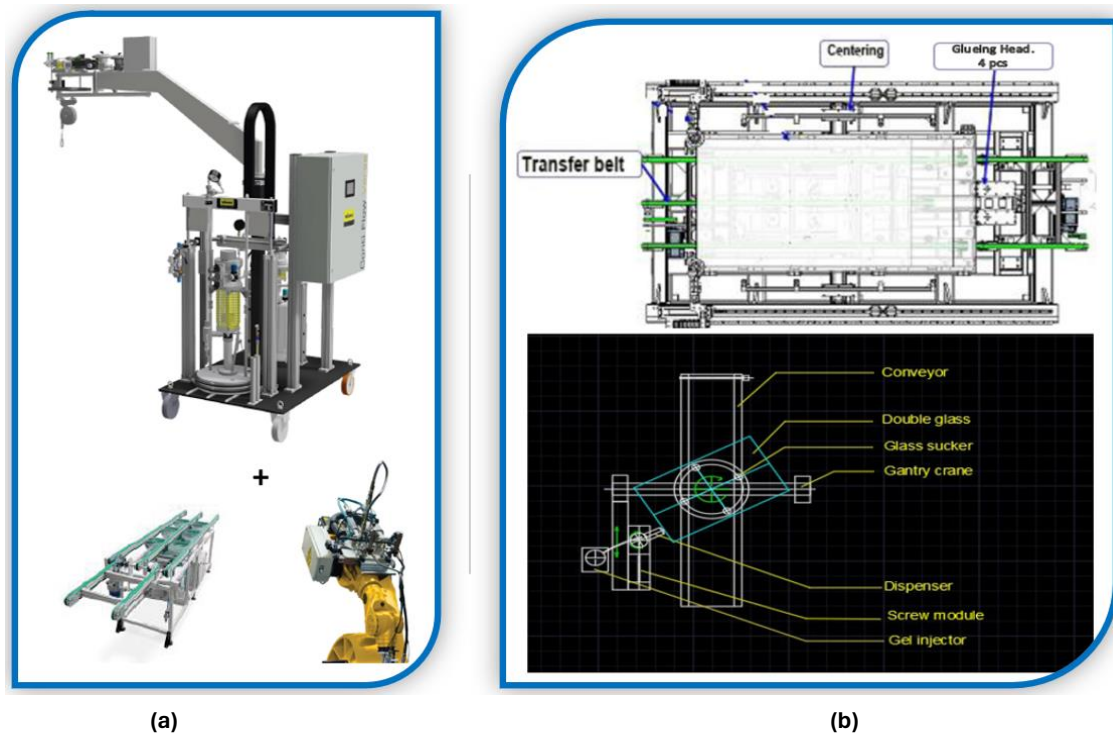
Schematic and visuals of PIB gluing machines: (a) PIB heated extruder and dispenser with the transport system and optionally a robot integrator [83], (b) Equipment internal structure with a conveyor belt, centering system, 4 gluing heads and up and down suckers for glass (top-right). Main componentry layout of the PIB dispenser (bottom-right) [82], [84]. Blue border: tailored to L-F module assembly.
